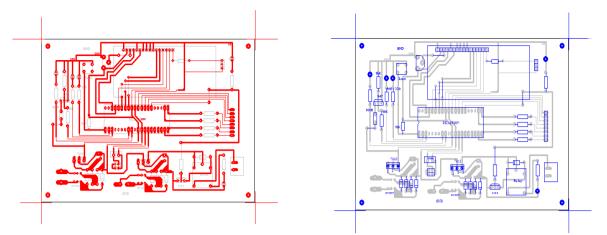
Printed circuit design of (a) soldering side view (b) component side view of the control lock for antibacterial clothes dryer
